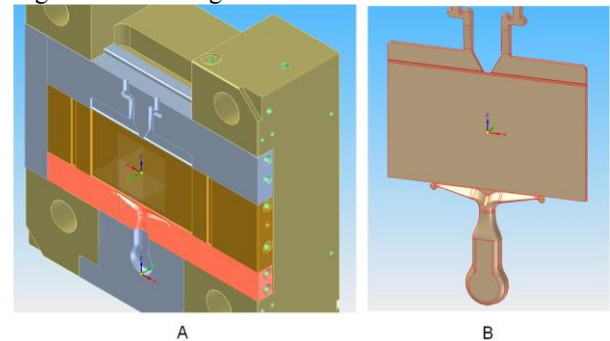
CAD – Models of the test die (A) and cast part (B) for release agent test trials
